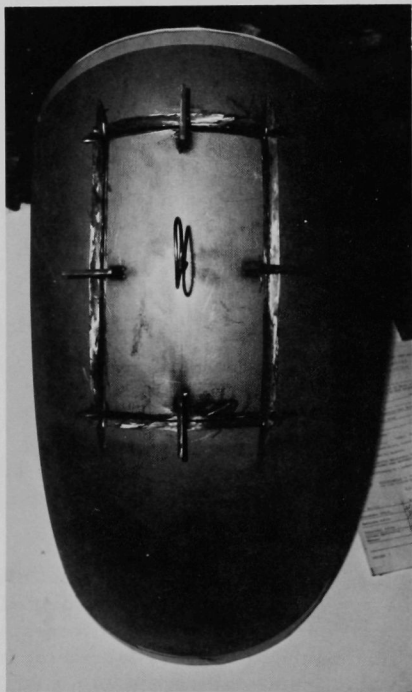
First Elbow-weld Specimen, Showing Lightweight Positioning Clips. ANL Neg. No. 103-N5788.
